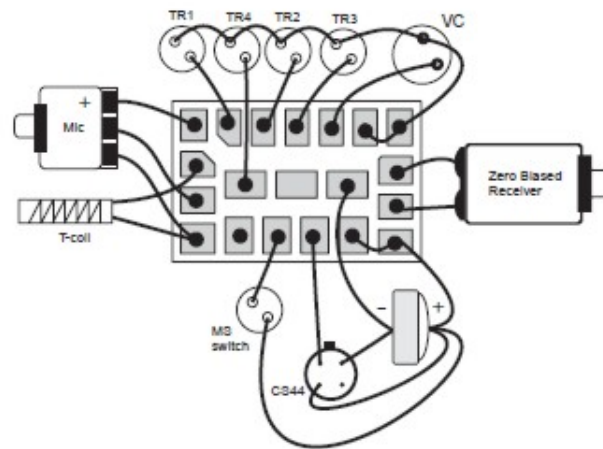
Example of Assembly Diagram For Two-terminal Trimmer Circuit
